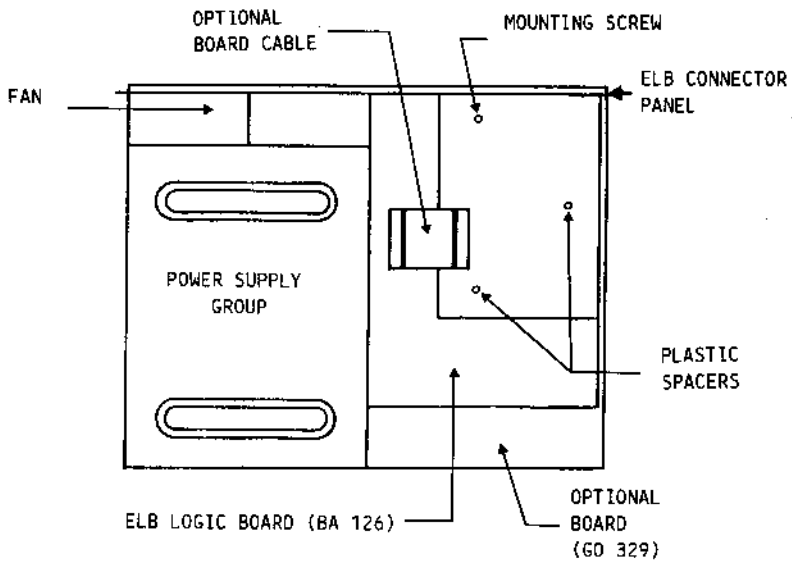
Installing the Optional Board for Pin Pad and Badge Reader
